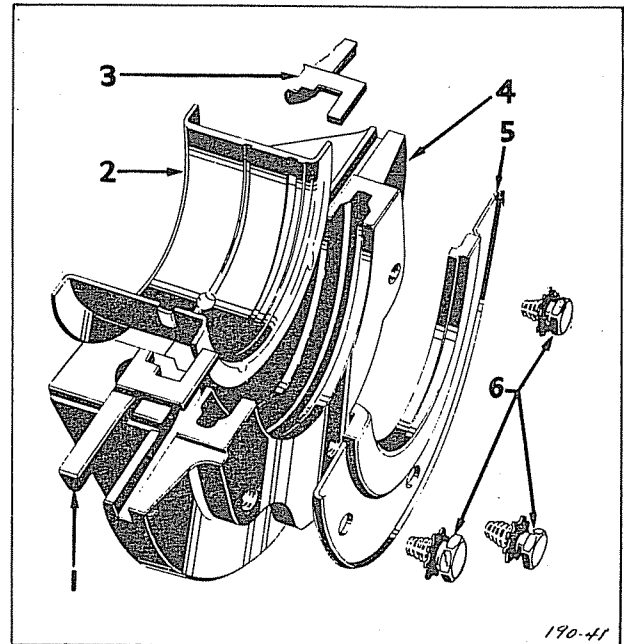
Crankshaft Rear Bearing Cap Oil Seals (Exploded view).
